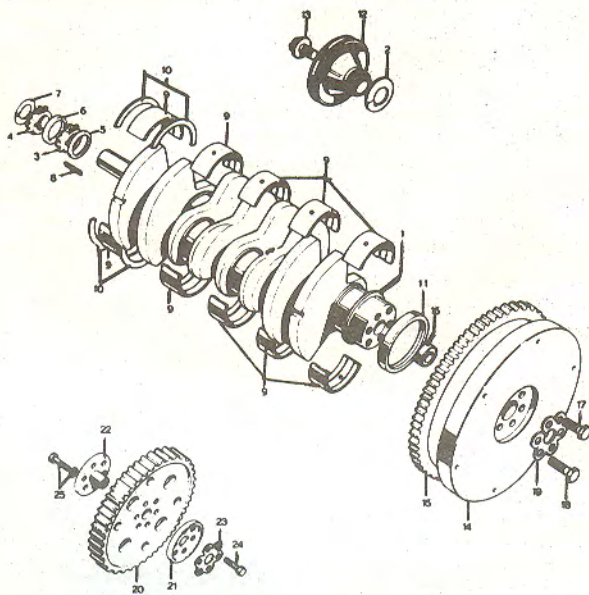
Exploded view of the crankshaft and its associated parts.
